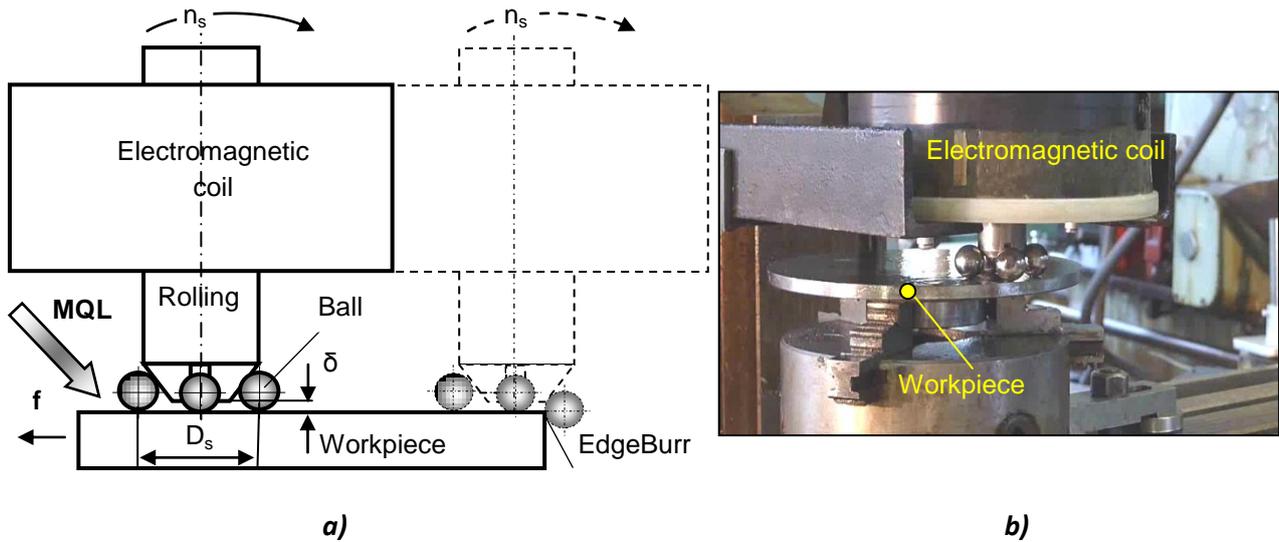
Concept of Magnetic Assisted Roller Burnishing of flat surface (a) and the photo of the MARB equipment (b)
